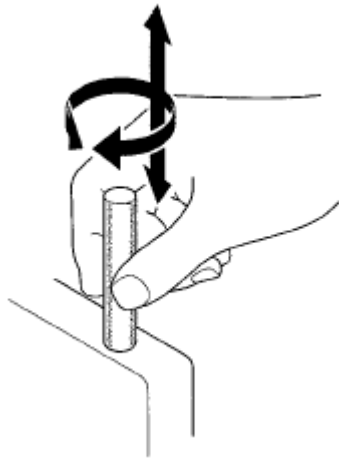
Polishing Valve Body Bore Using ATF-Soaked #600 Paper
